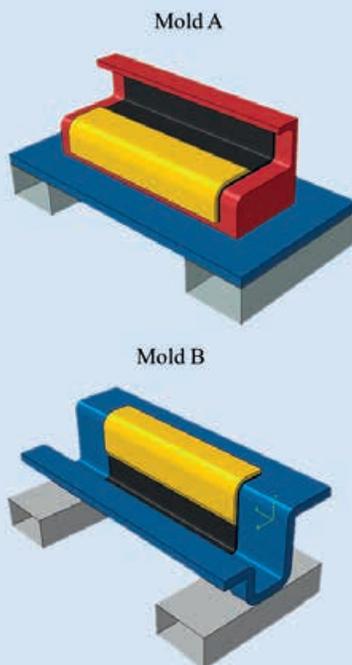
Original (mold A) and optimized (mold B) molds for the production of a z-shaped composite part
